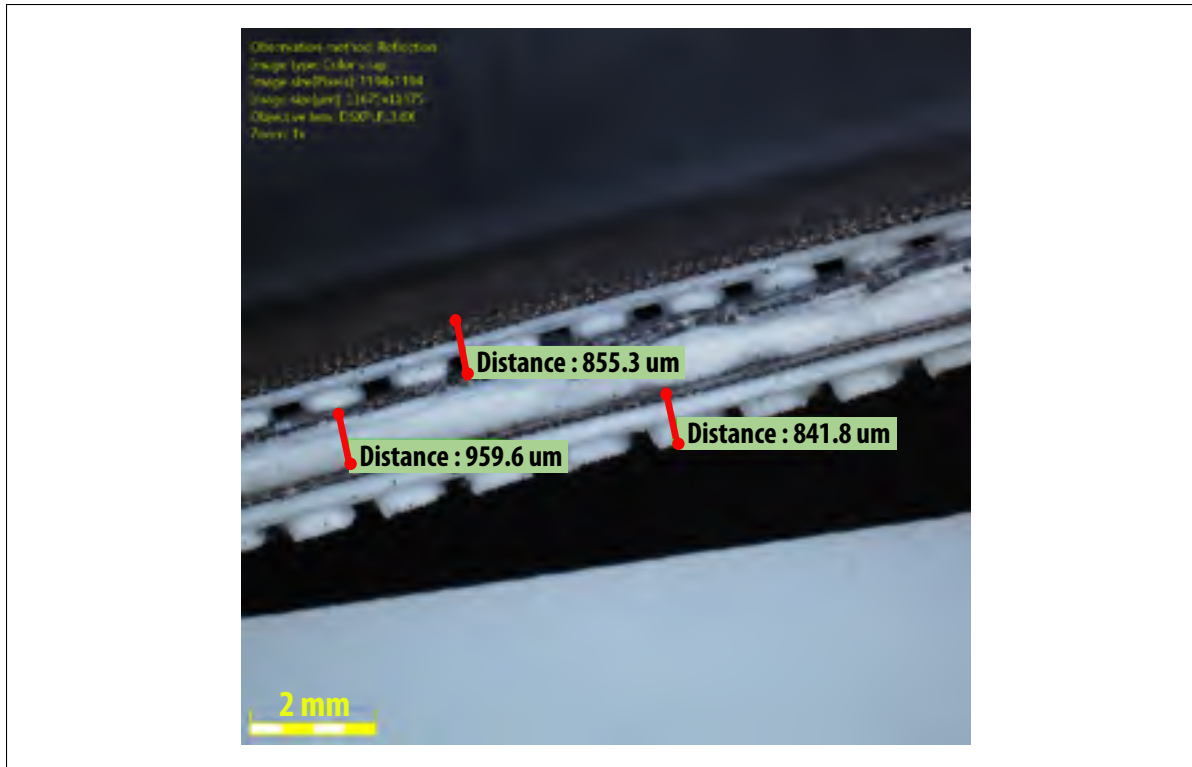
Cross-sectional view of the sensing element (not including the PCB)
